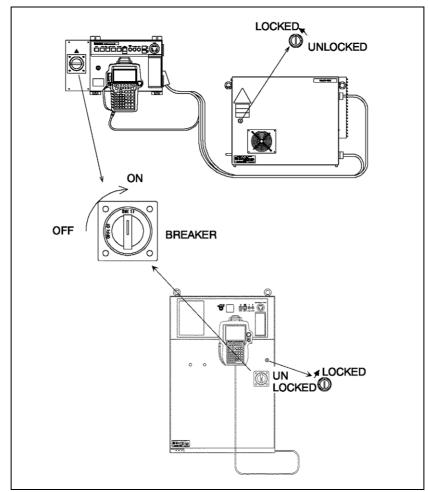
(d) Circuit breaker and latch of robot controller
